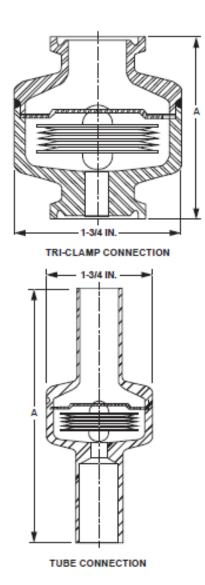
DS100 Series Thermostatic Steam Trap Dimension
